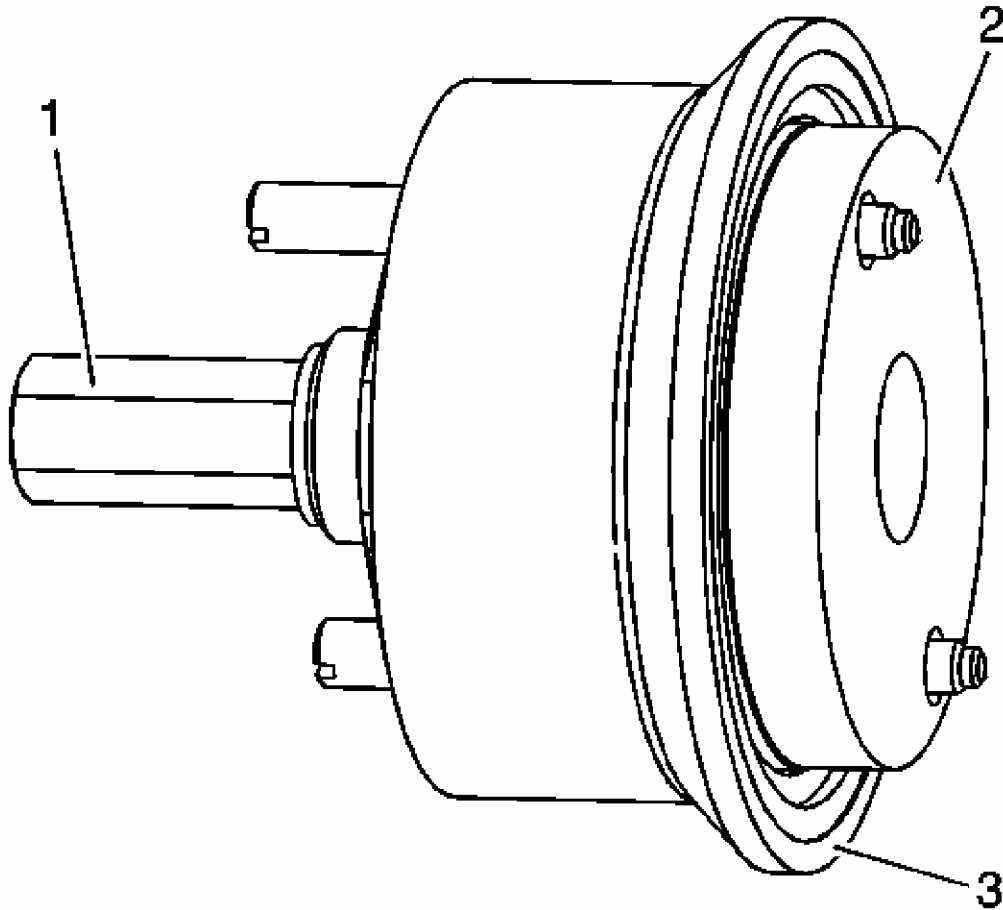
View Of J 45930-A Crankshaft Rear Oil Seal Installer
